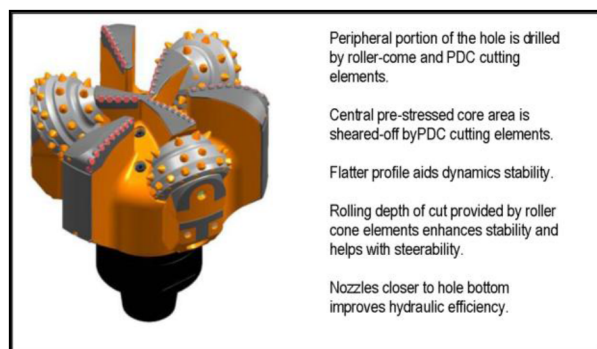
Hybrid Drill Bit Design That Combine PDC Cutters and Roller Cones
